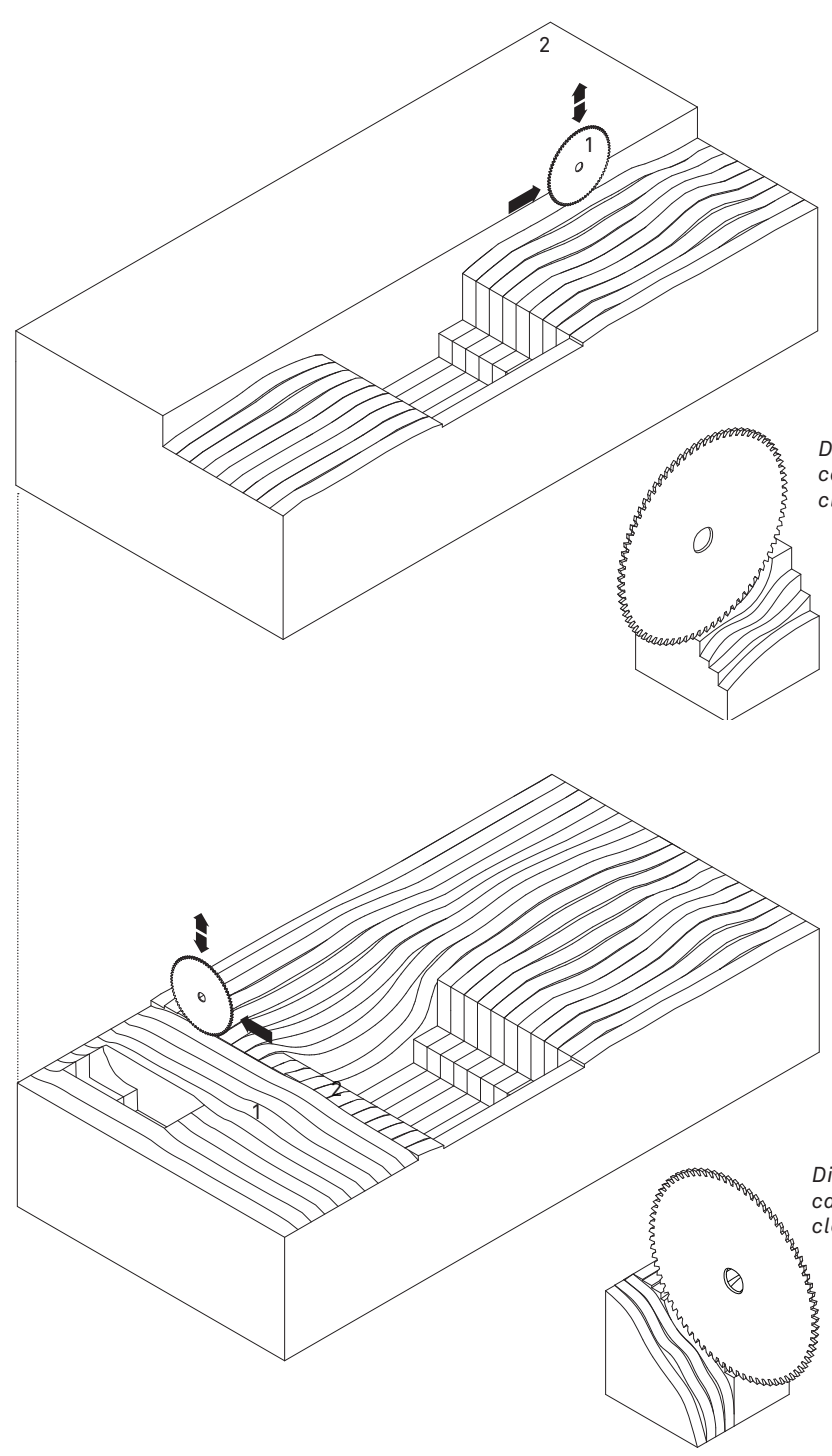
Isometric view. Volcanic rock top face being carved with a band saw in both top and bottom faces
